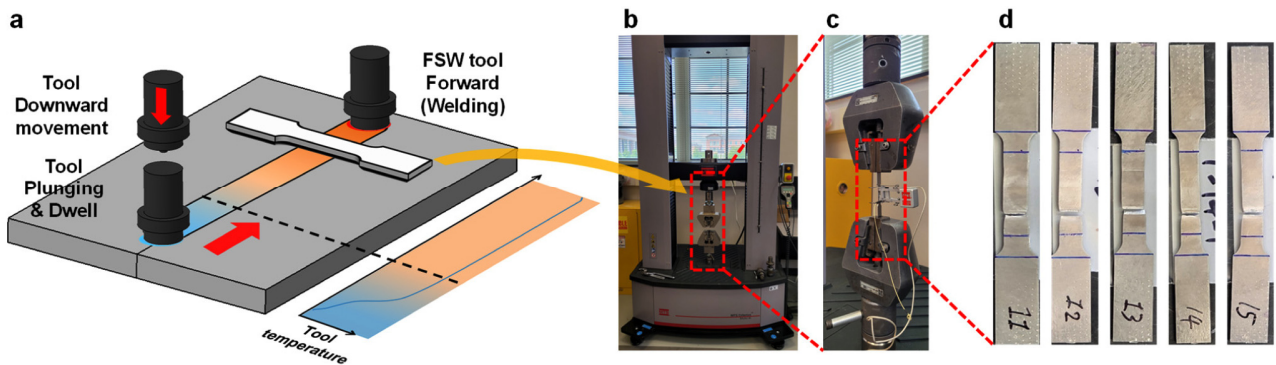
Tensile test: (a) location of tensile specimen extraction and tool temperature stabilized region, (b) the used tensile testing machine, (c) tensile specimen setup, (d) fractured tensile specimens
